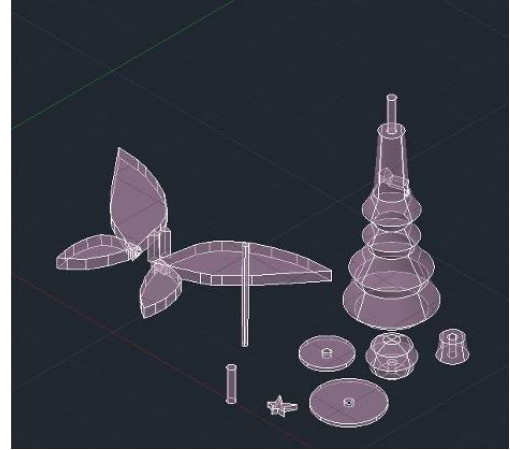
3D model of the parts of a chess piece prepared for 3D printing
